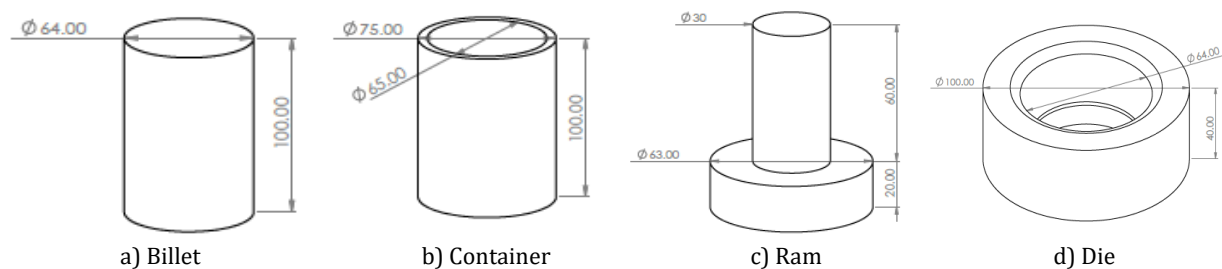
SolidWorks geometrical models of the Billet, Container, Ram, and the Die with dimensions in mm (± 0.05)
